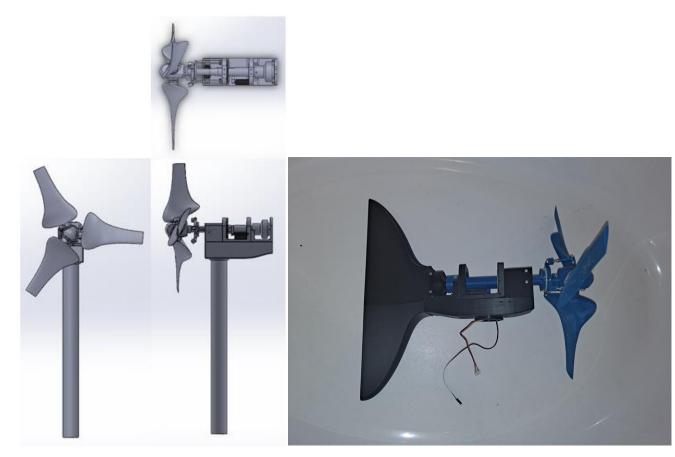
HWR2 Digital Assembly Figure 4: HWR2 Physical Assembly
